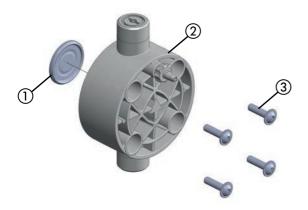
Spare parts kits (dosing head made of plastic)
